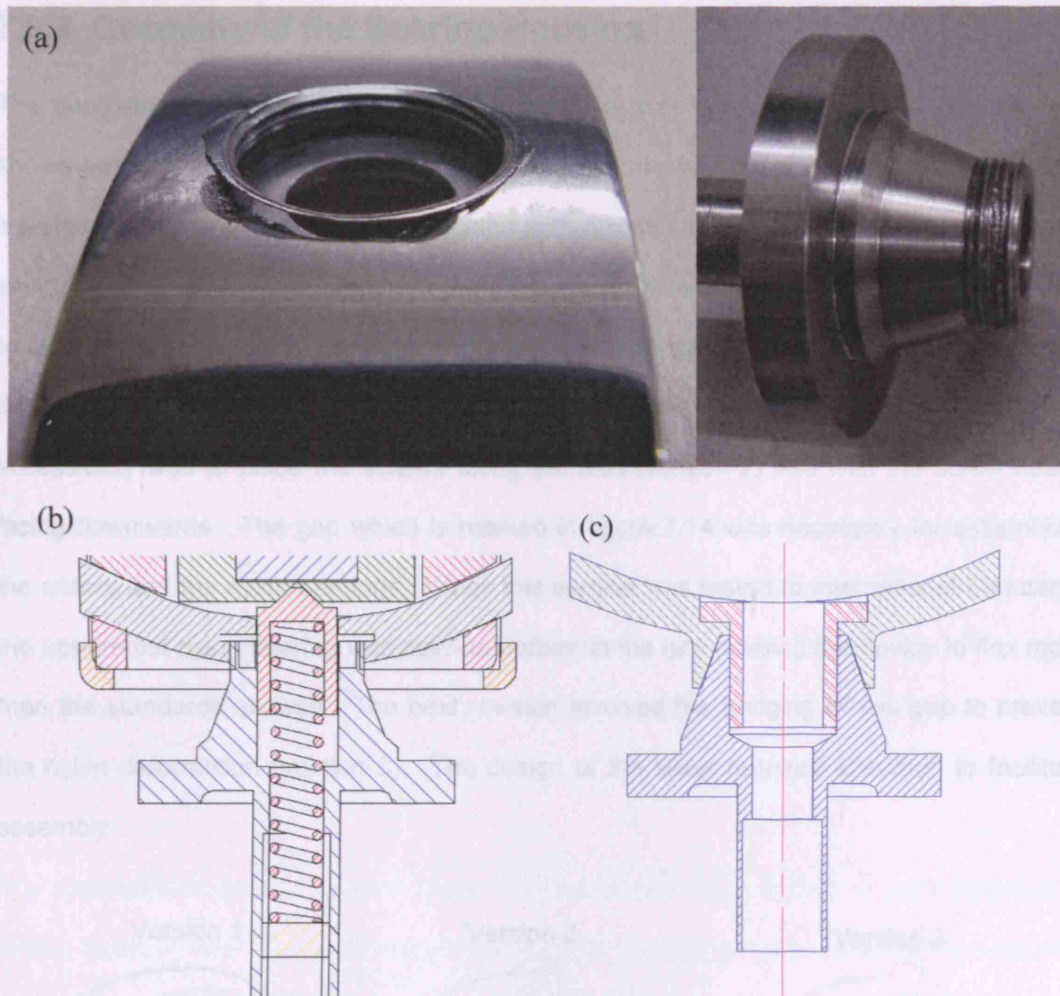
(a) Damaged screw thread. (b) Connection design for version 1, 2 and 3 (c) Solution: connection design for version 4 Pink hatching is bolt component
